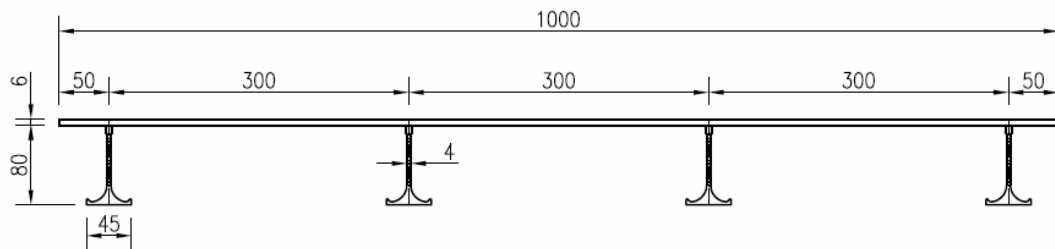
(a) Layout of test structure 19A for fillet-type fusion weld in mm
